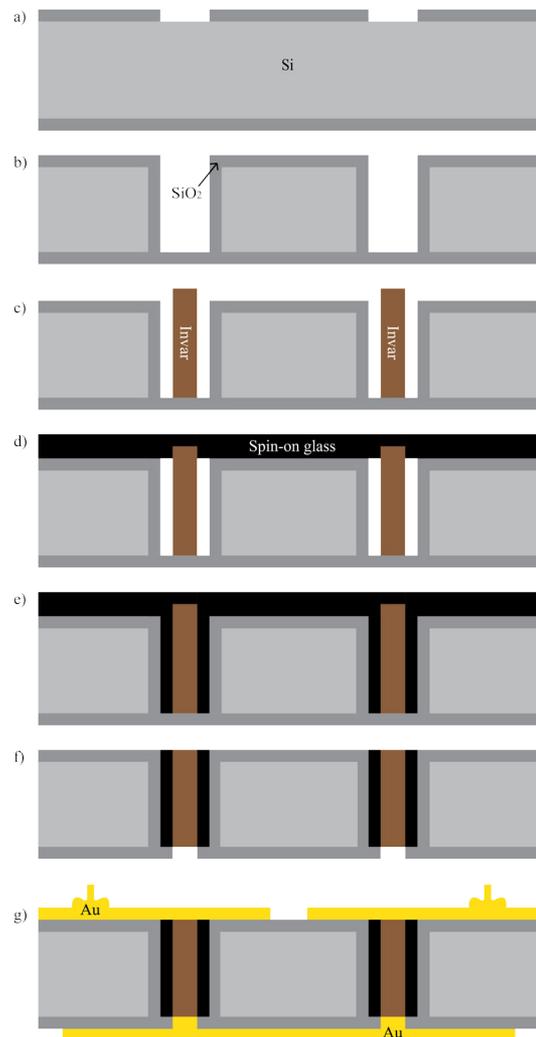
Schematic presentation of the magnetic assembly and integration of the TSV Invar rods. a,b): Creation of TSV holes. c): Assembly of Invar rods using a magnet. d,e): SOG filling. f): Opening backside oxide and top side grinding. g): Metallization, patterning and wire bonding.
